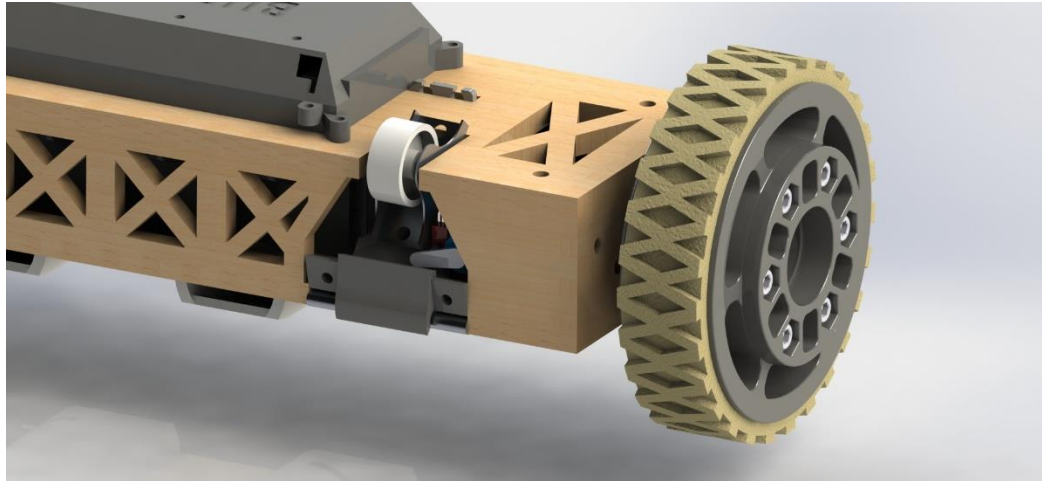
BURRITO Caster Wheel Arm Stowed
